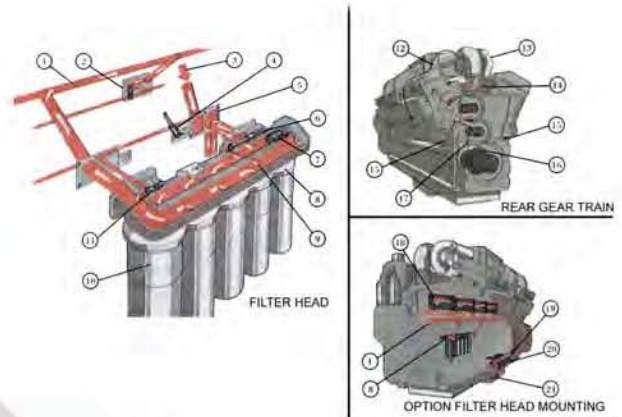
Lubricating oil flow (3/4 front view KTA-38)
